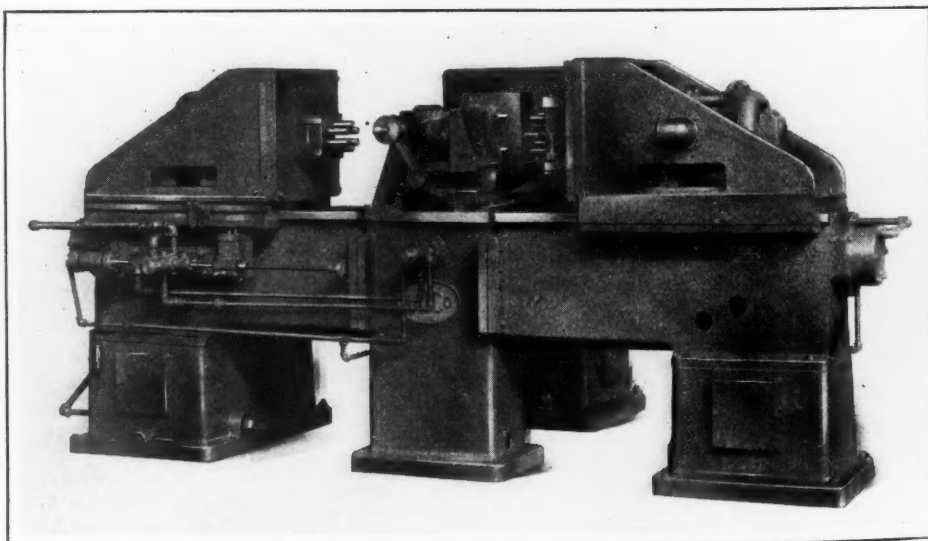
"Natco" Three-way Hydraulic Multiple-spindle Driller
